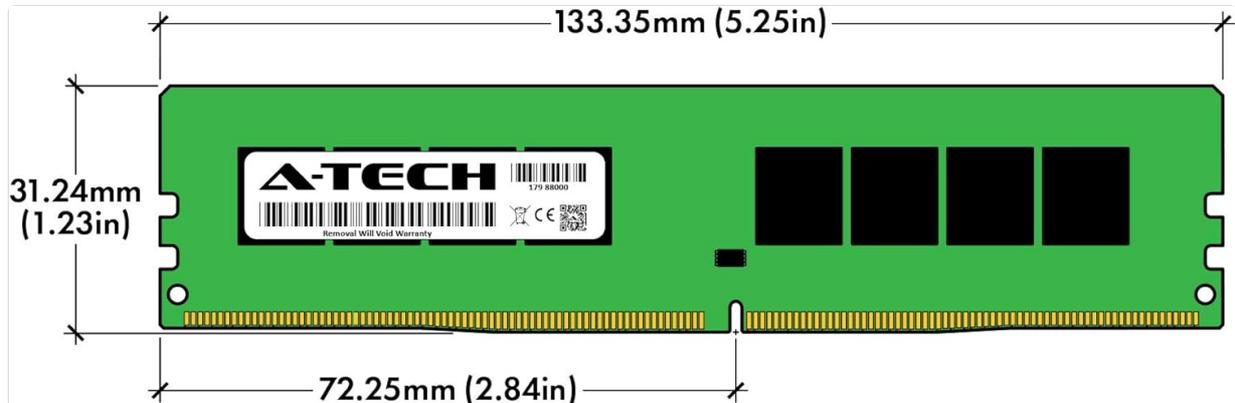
Detailed dimensions of a single A-Tech DDR4 DIMM module.
